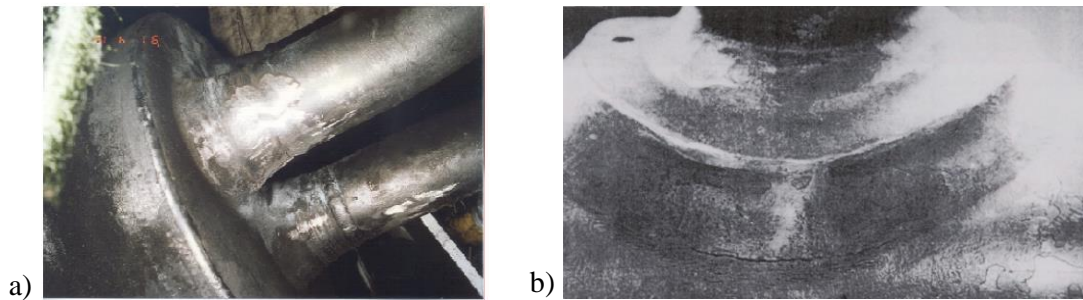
a) Creep-fatigue cracking in tailpipe-pintle welds [9]; b) Creep cracks at the weld of a branched pipe [10].
